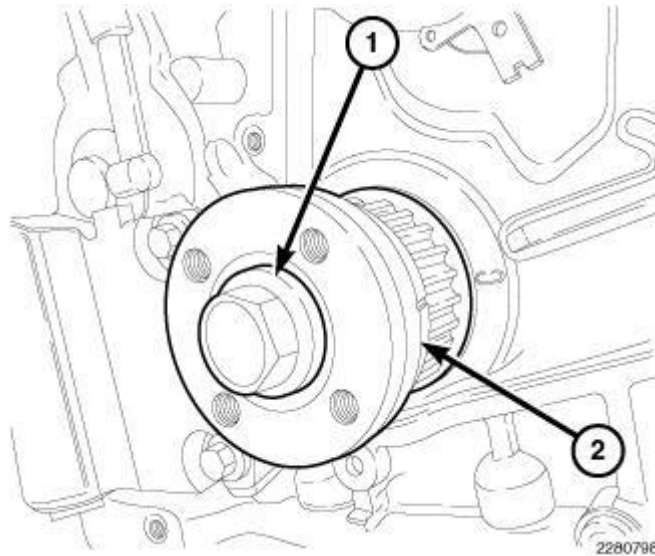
Crankshaft Timing Belt Sprocket & Bolt
